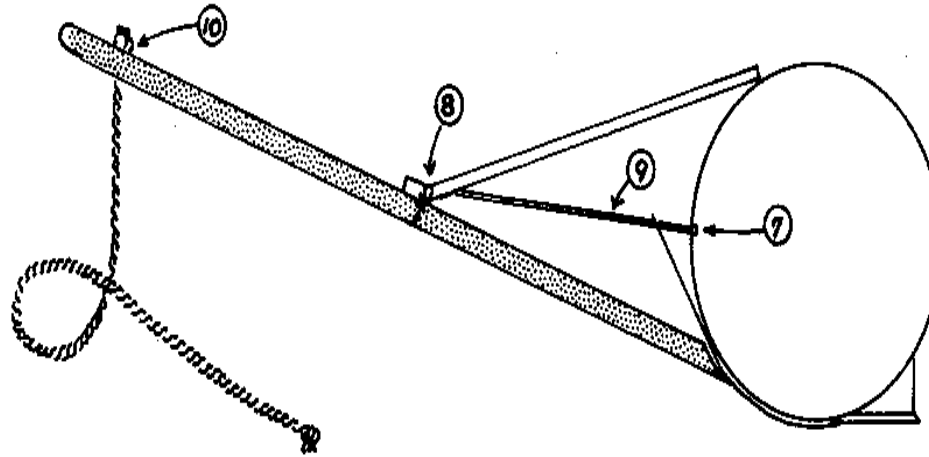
INSTALLING BRACE WIRES AND ROPE
